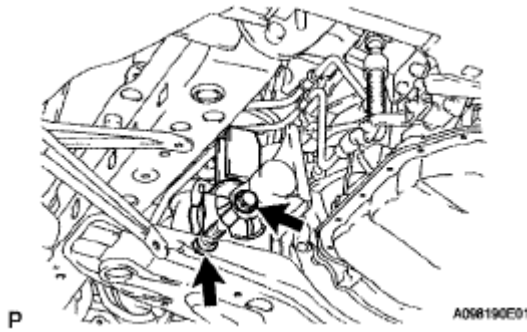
Identifying Front Engine Mounting Bracket And Bolt
